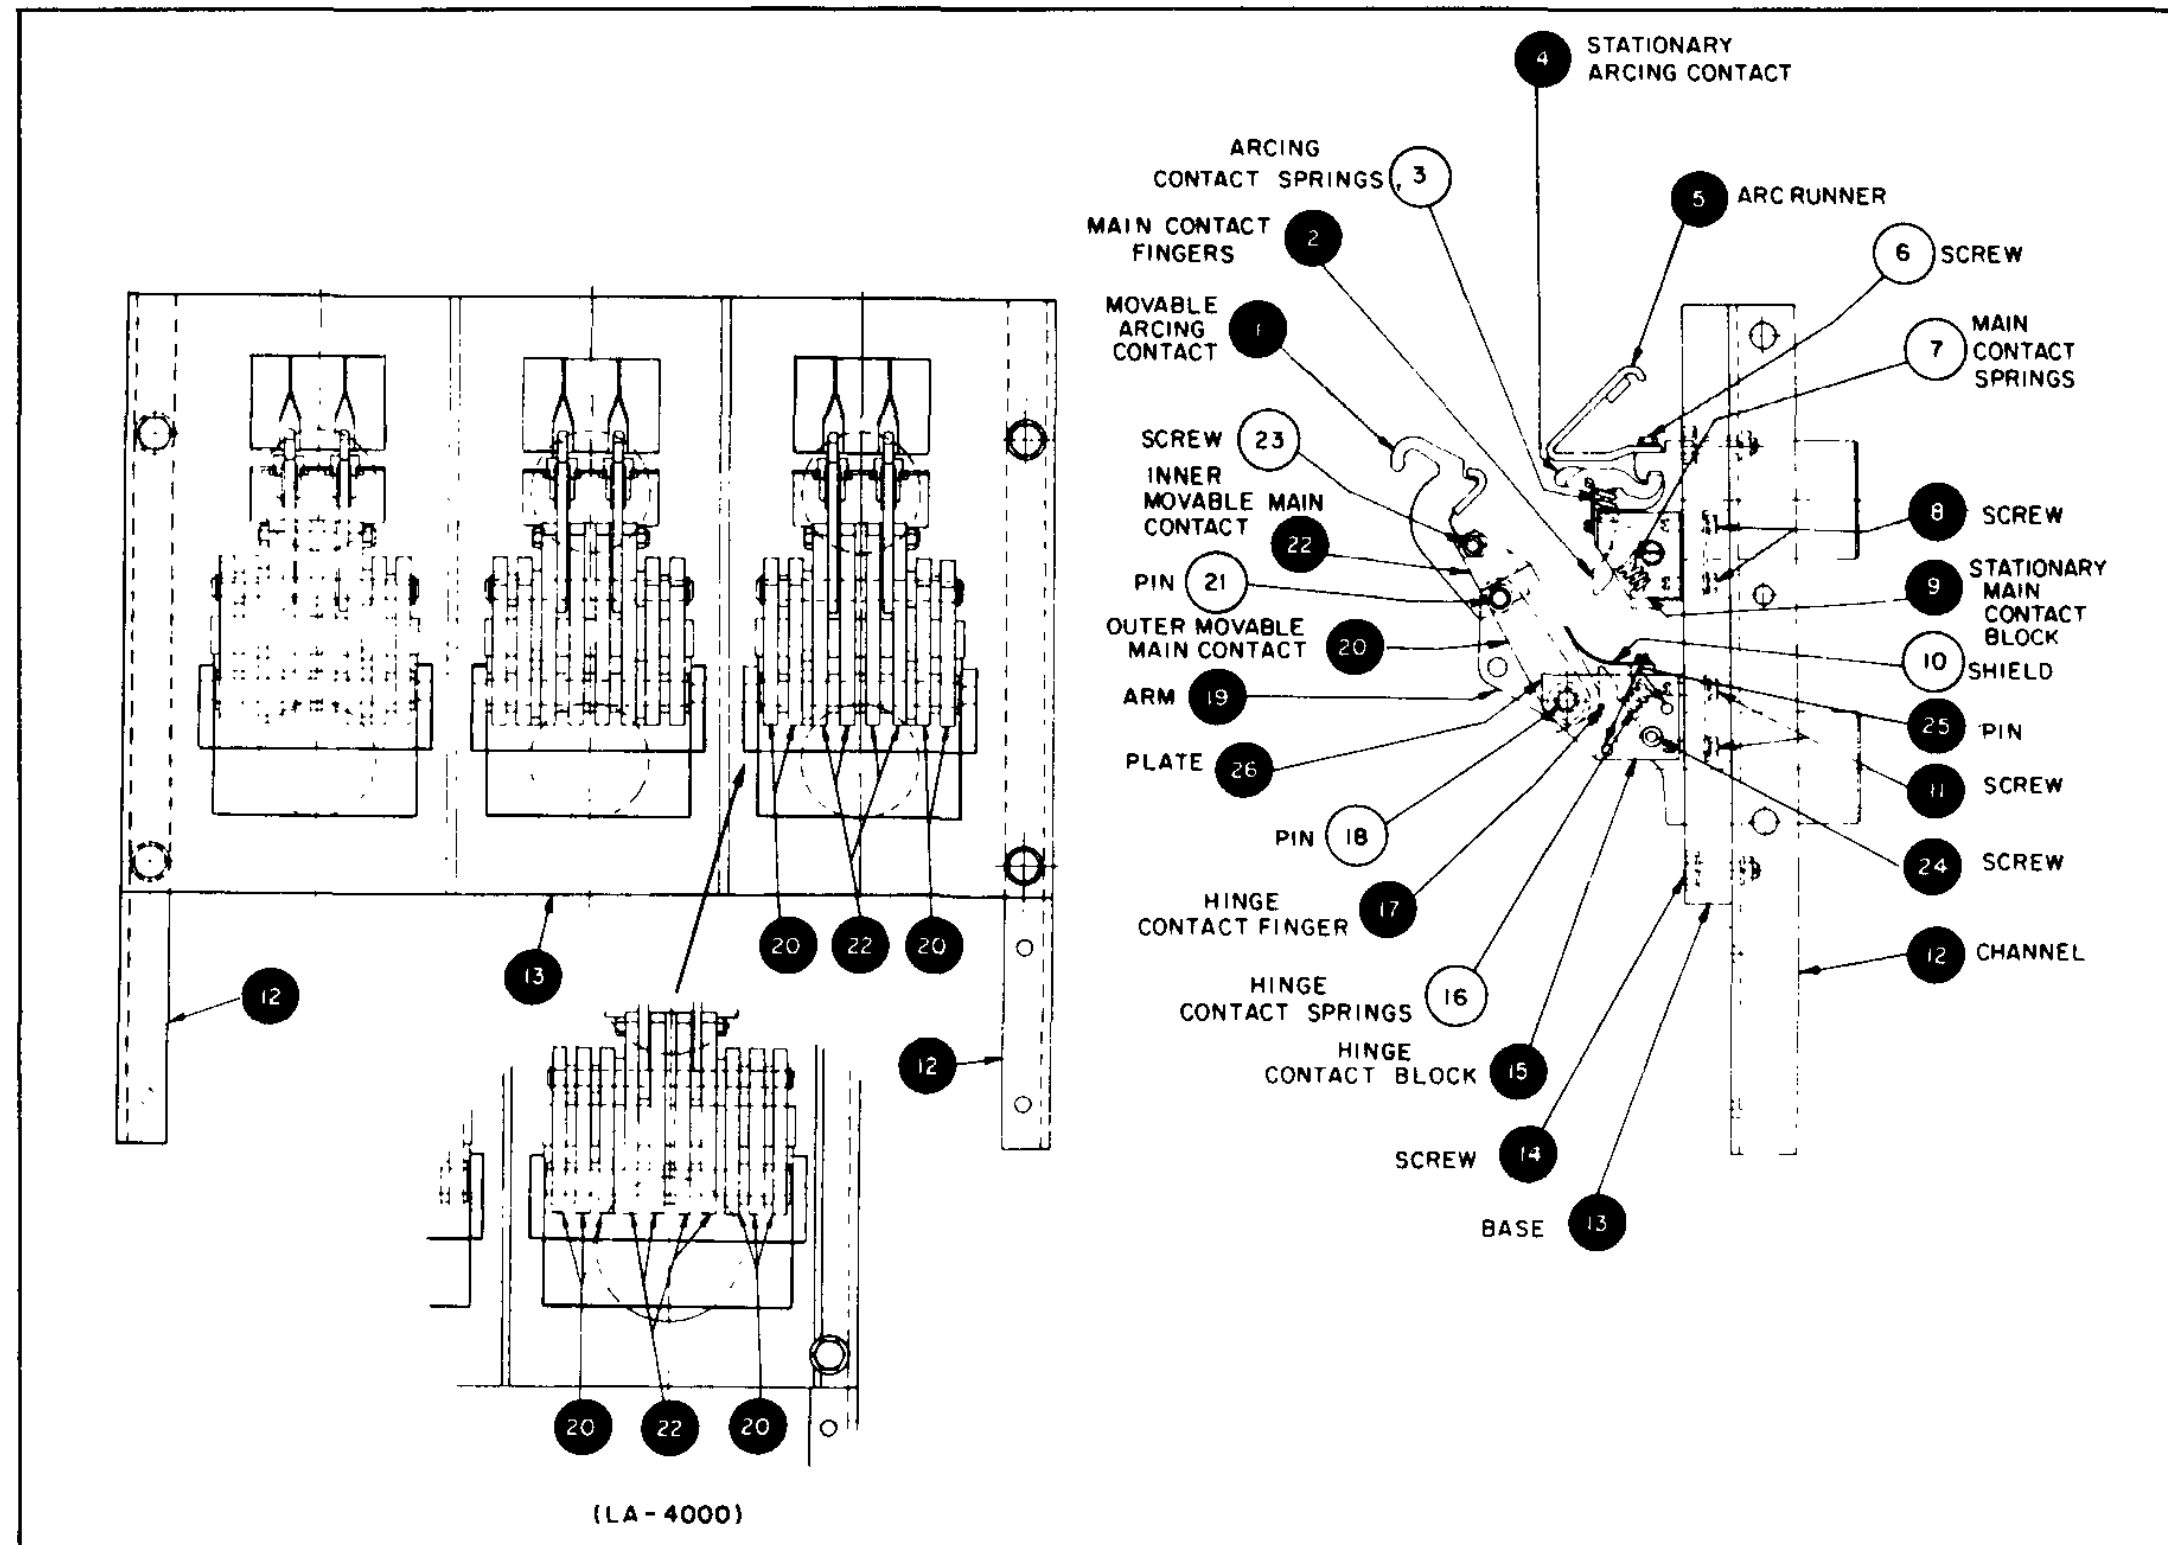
LA-3000 and (LA-4000) Breaker Panel Assembly
